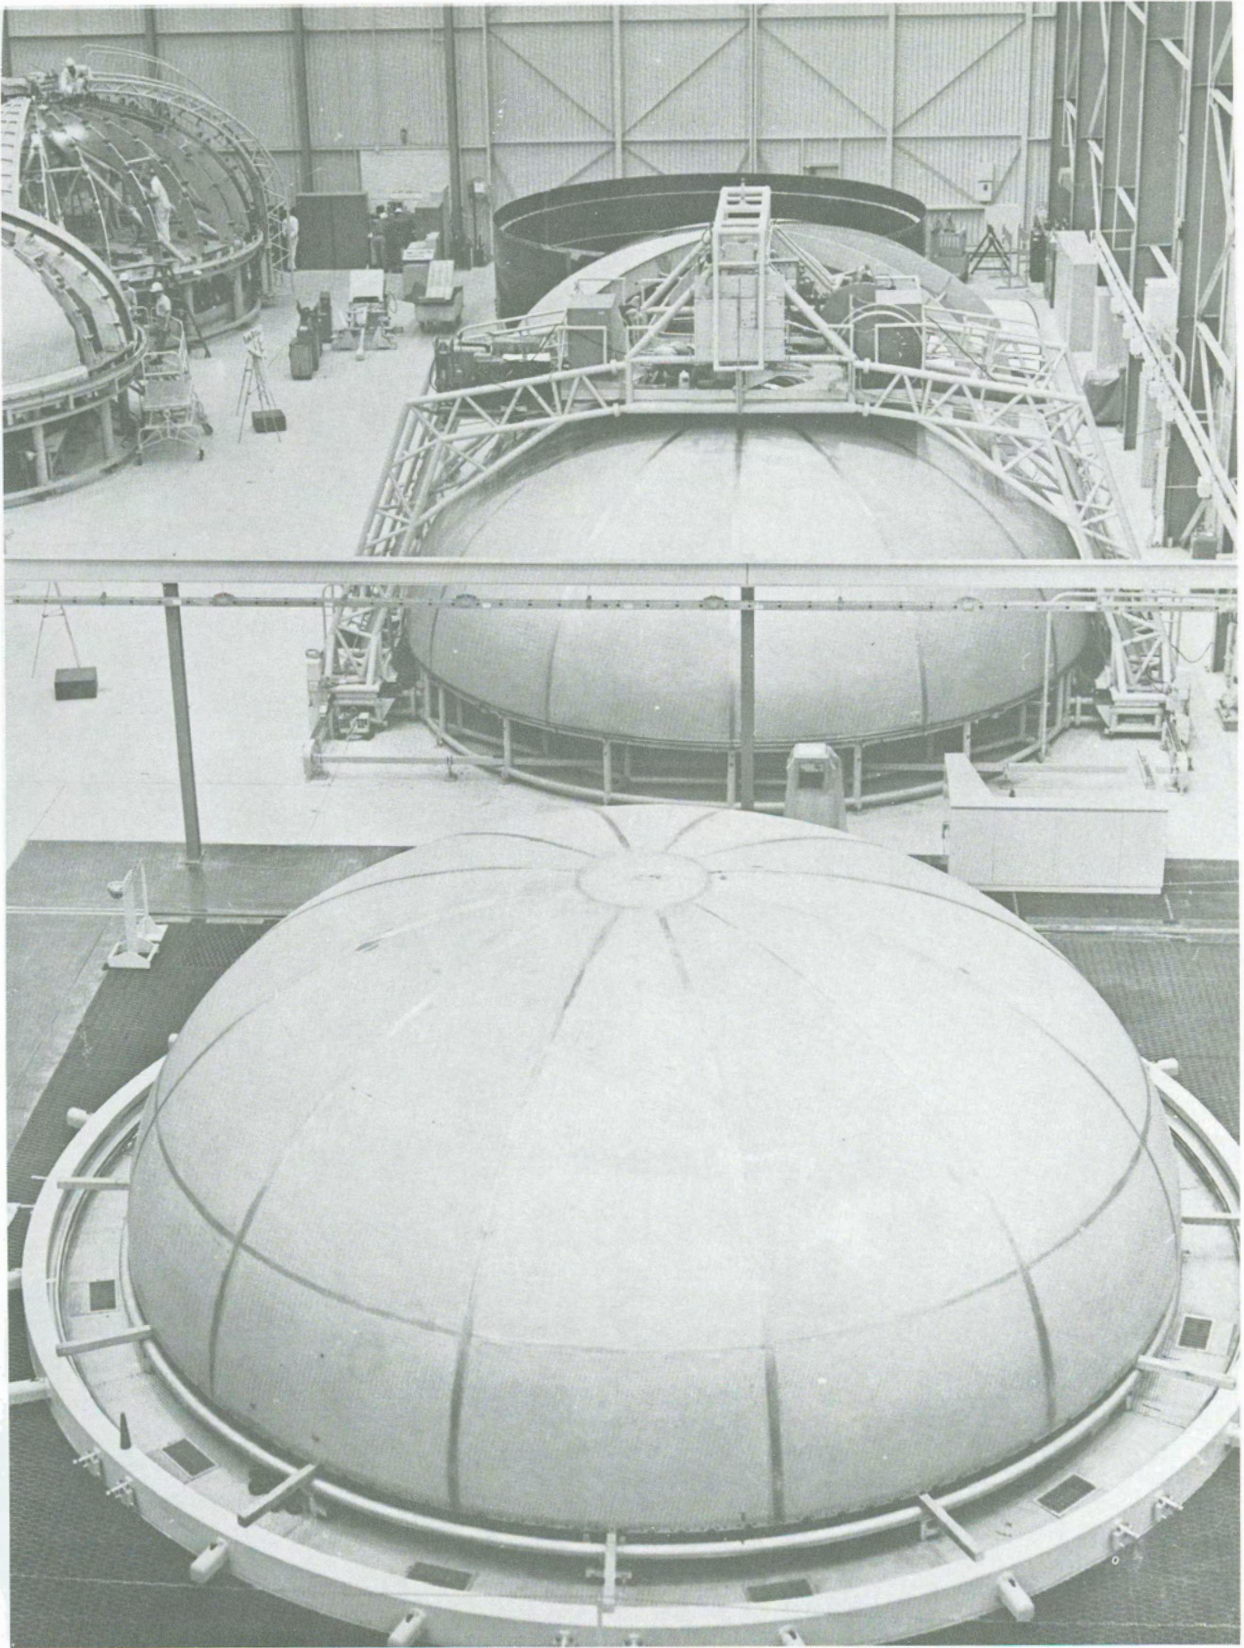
AFT COMMON BULKHEAD - The first S-II bulkhead which will be used for static tests is shown on the welding fixture at North American's Seal Beach facility. Horizontal and vertical lines indicate the chemical preparation used to protect the weld areas. Lines also indicate how the bulkhead was fabricated.
